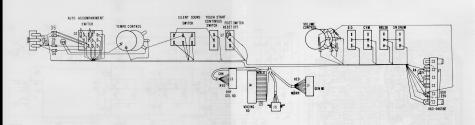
RHYTHM III CABLE ASSEMBLY 011-046388
